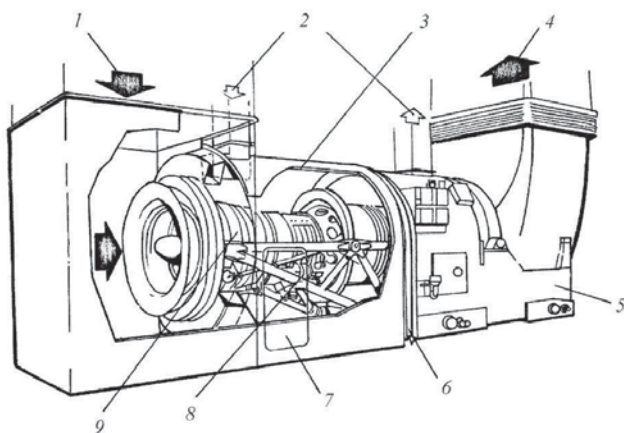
Placement of the Rolls-Royce Olympus TM3B engine in a heat and sound insulating container:
